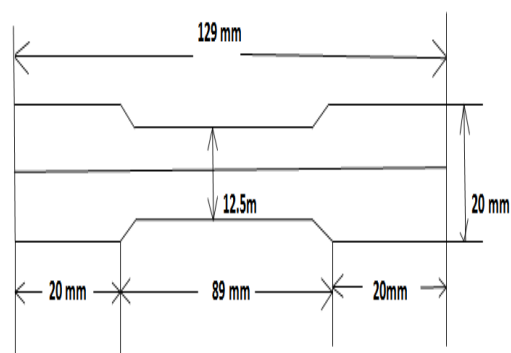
Showing specimen dimensions for testing UTS (Ultimate Tensile Strength) on UTM.
